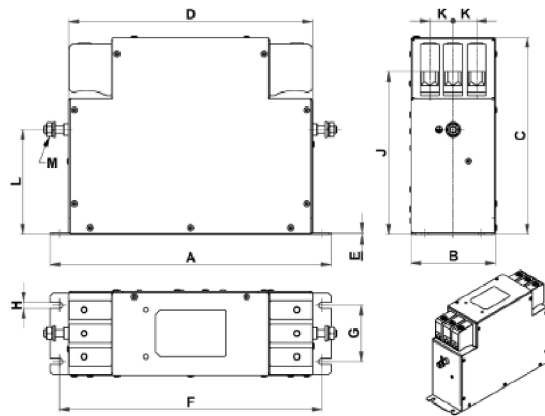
Dimension drawing of FN 3287 series filters (unit: mm)
